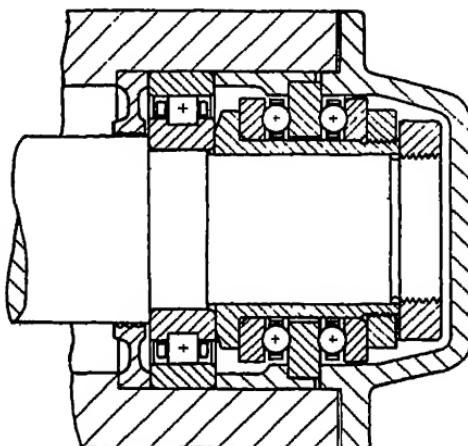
A TYPICAL DOUBLE THRUST BEARING MOUNTING
